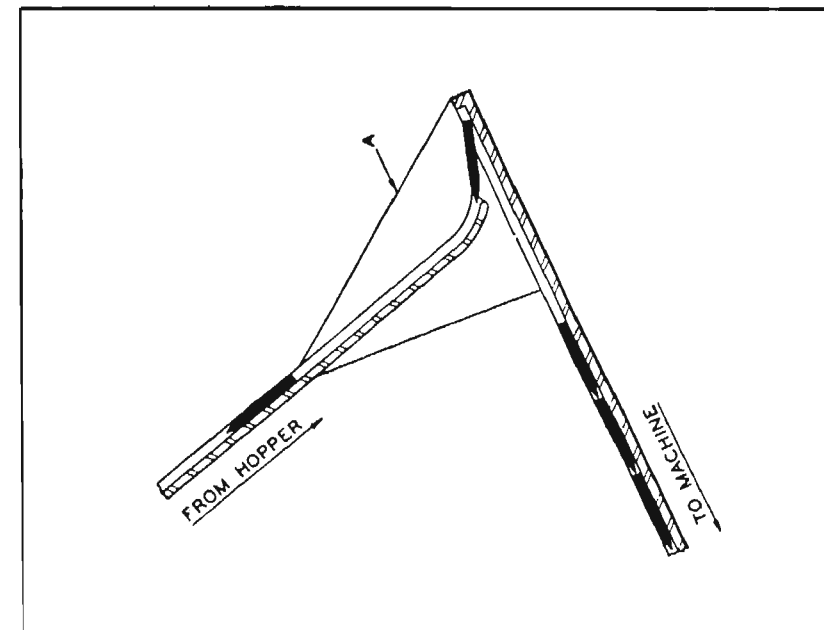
Track Arrangement for Reversing Position of Parts Received from Hopper.
